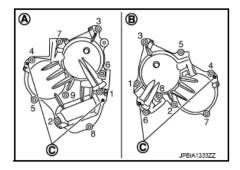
Intake Valve Timing Control Cover Mounting Bolts Loosening Sequence (Bank 1 And 2)
